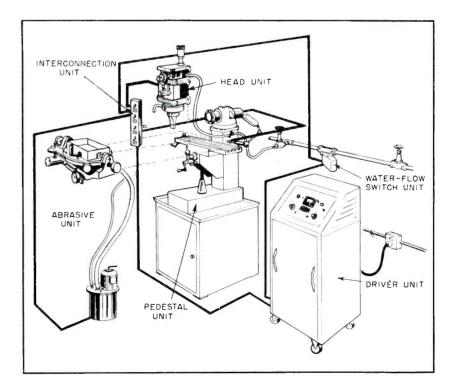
Diagram of the impact grinder showing all units of the equipment
